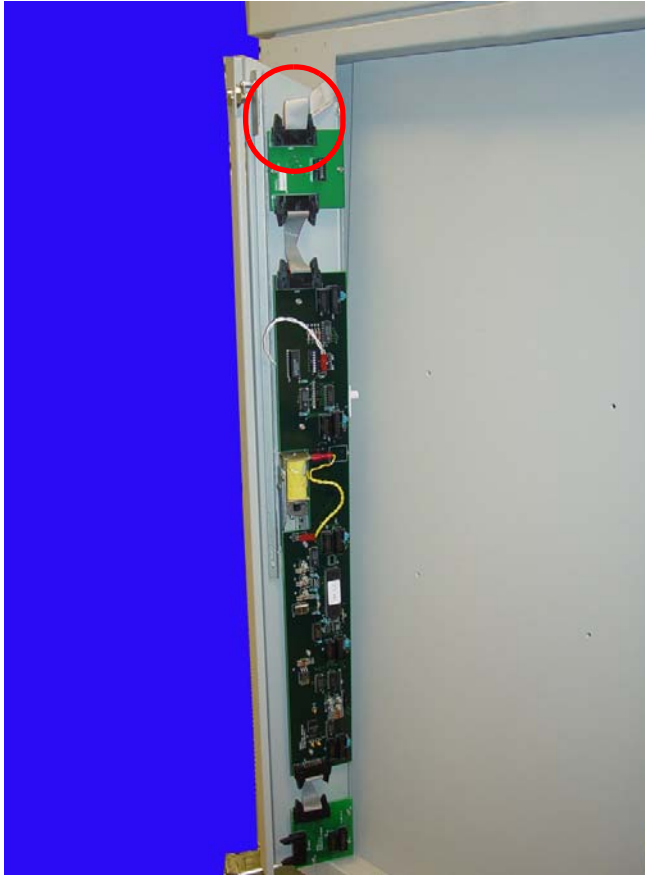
Disconnect the ribbon cable and remove the wireway
